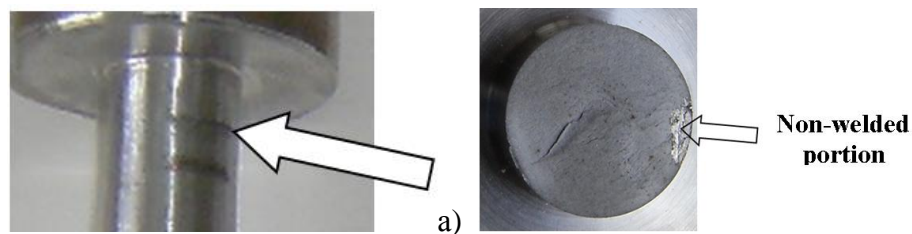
View of Discontinuity (A) And Fracture After Static Strength Testing of the Welded Portion (B)
